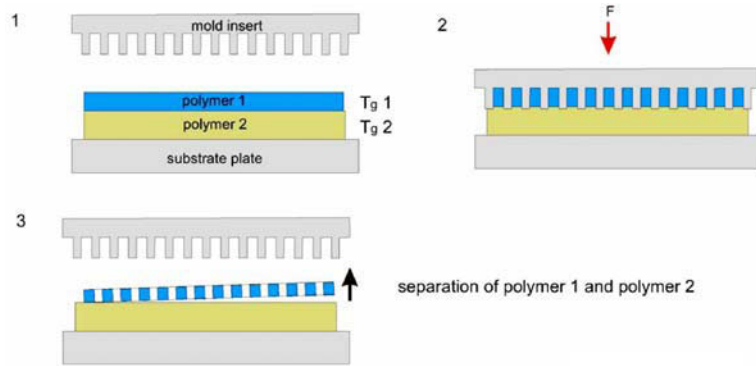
Principle of two-layer molding for molding through-holes.
